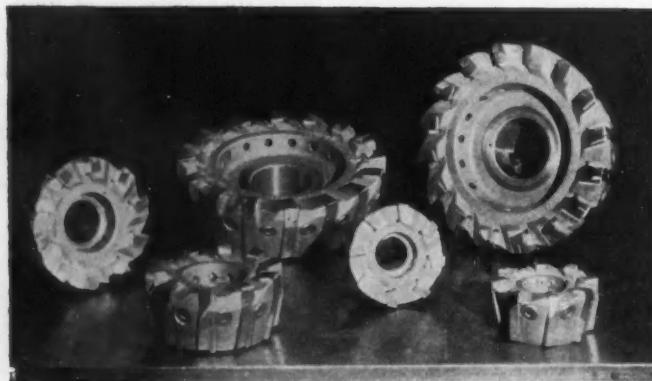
ASSORTMENT OF INSERTED-BLADE TUNGSTEN-CARBIDE MILLING-CUTTERS
